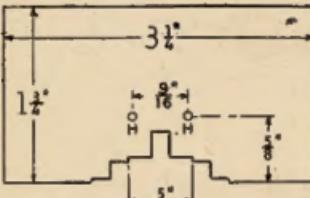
Shield for p.p. 6J6 stage, showing cutout to allow fitting over the socket and its associated fixing bolts.
